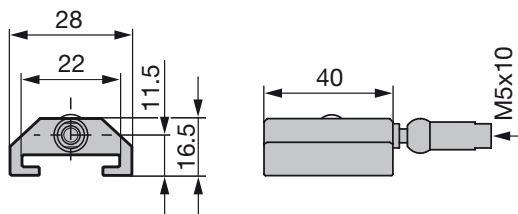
Installation dimensions of BTL5-T-2814-1S magnet
